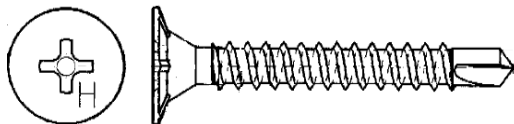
PHILLIPS WAFER HEAD (PWH) SCREW
